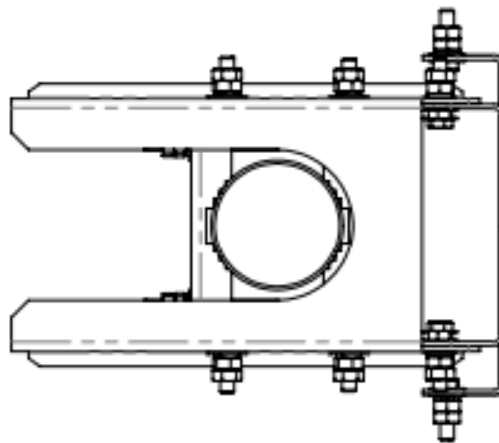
Mounting bracket to pole installation, Bottom and Top bracket assemblies – TOP VIEW
